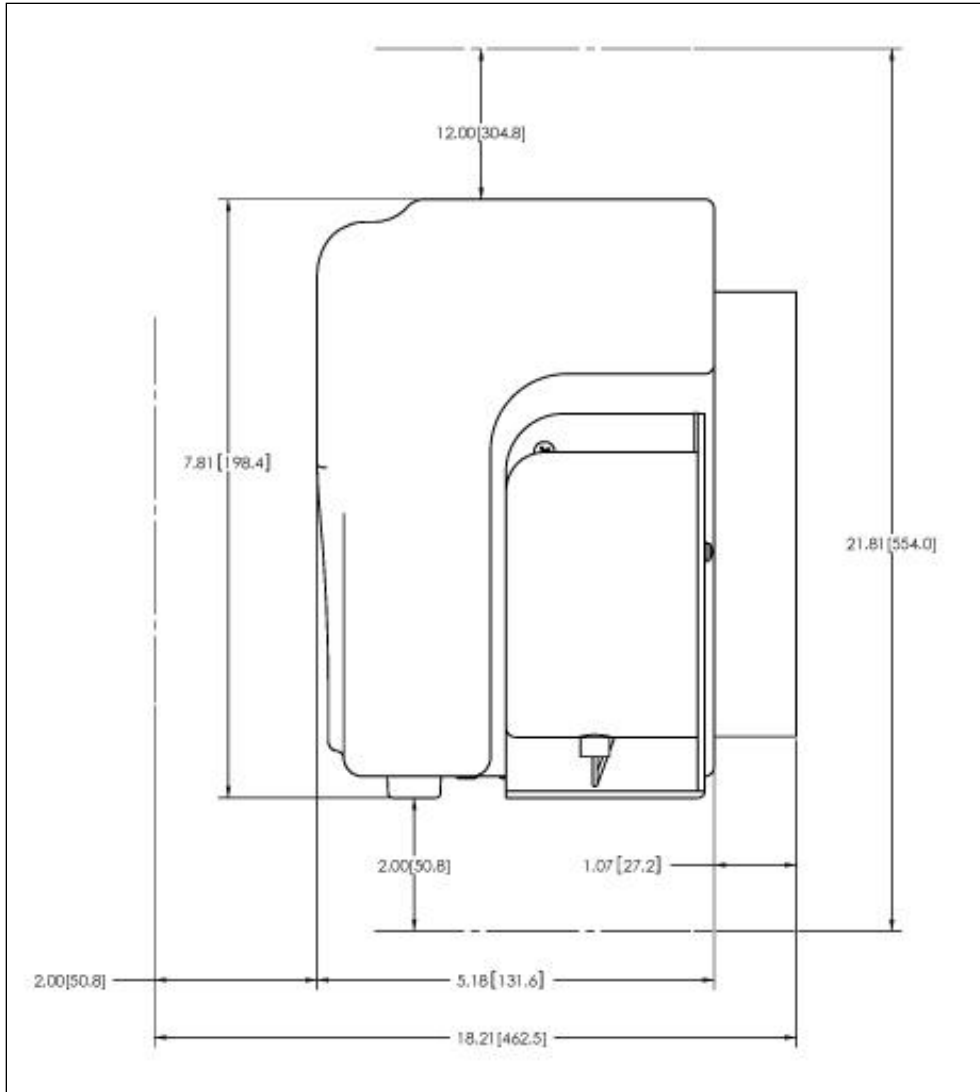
Sensor Dimensions and Required Clearances, Side View with Calibration Kit
